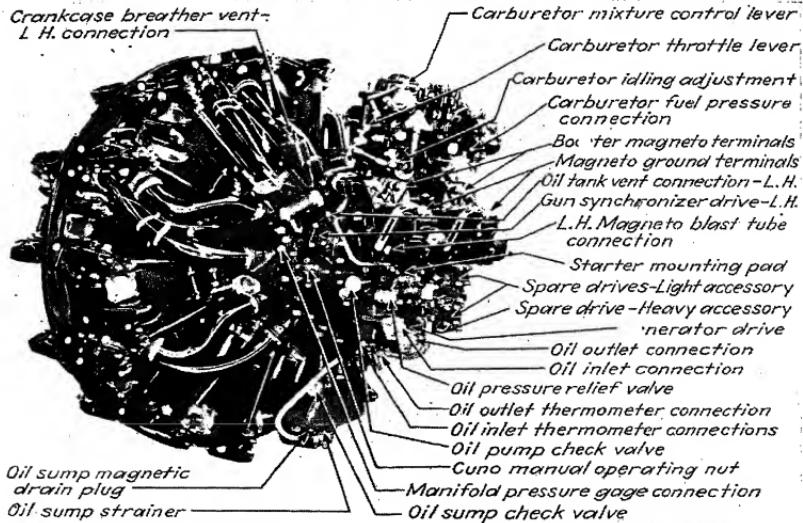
Three-quarter view of right side of 14-cylinder Cyclone engine.
